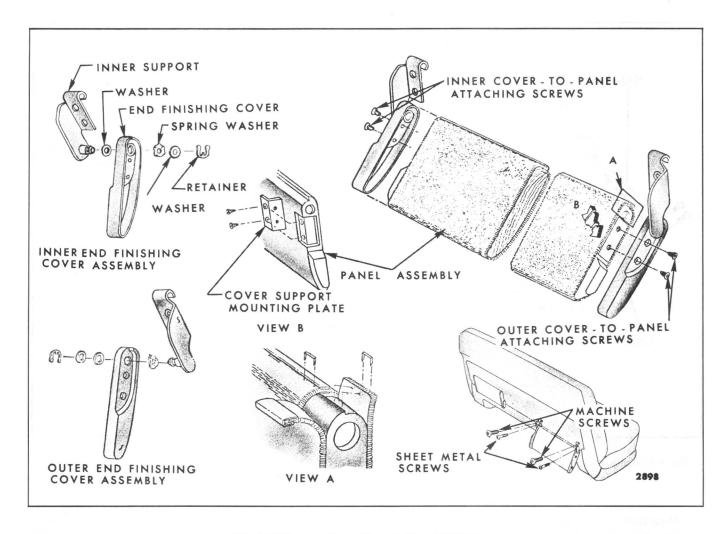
Footrest Assembly - Cadillac 6CB69 Styles
